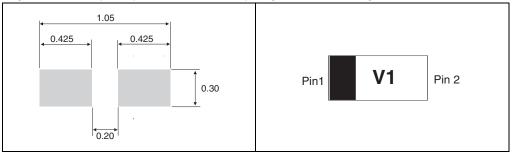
Footprint (dimensions in mm) Figure 10. Marking
